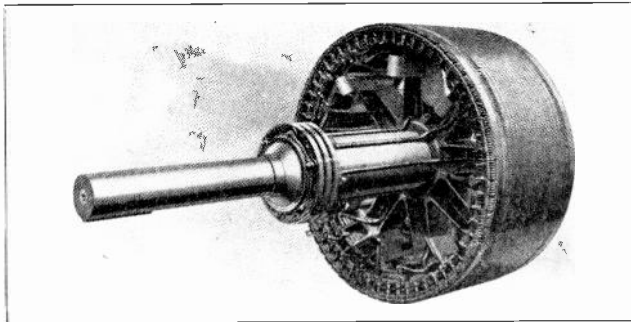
A. Phase wound rotor of a large slip-ring induction motor. This rotor has heavy bar windings which are not shorted together like those of a squirrel-cage rotor, but instead have connections brought out from each phase to the slip rings.
